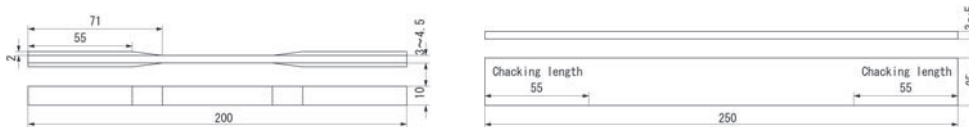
Specimen configuration (c) for 0° tensile test; (d) for resin with chips, 45° and 90° tensile tests; [mm]
